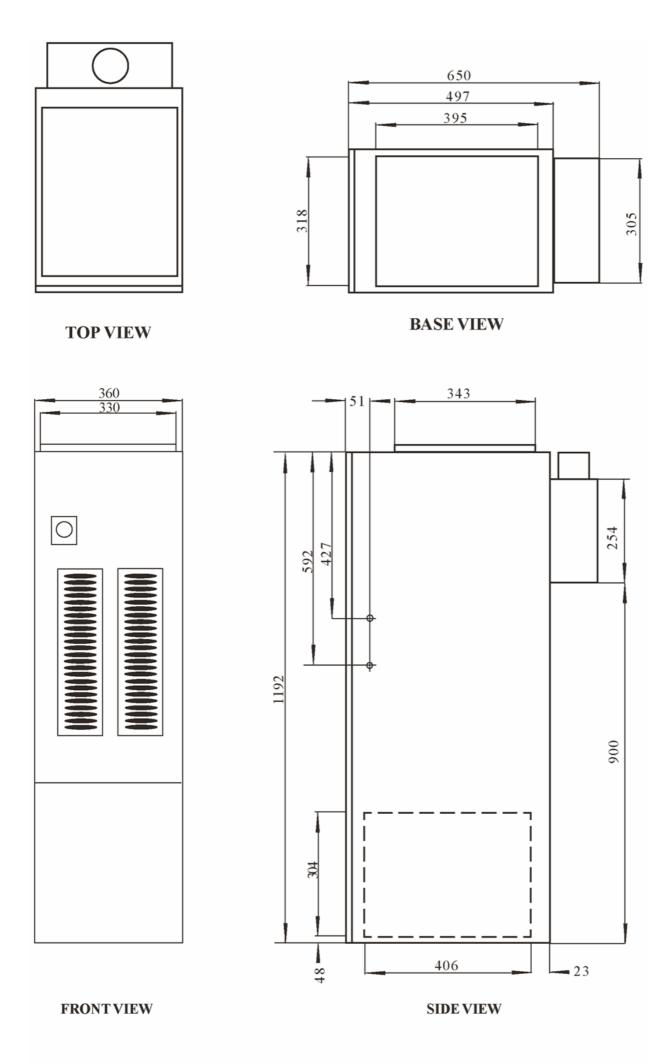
, PRINCIPAL DIMENSIONS (mm)
